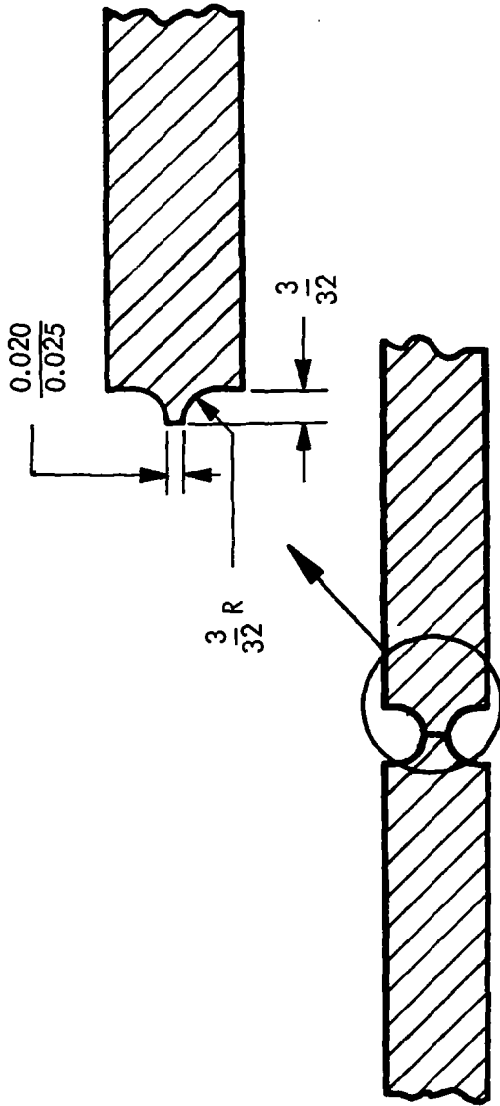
Plate Butt Weld Joint Designs and Typical Macrosections
